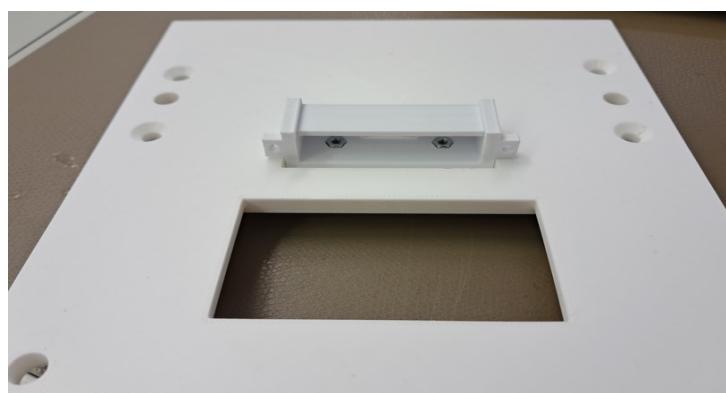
Mounting First Part of Spring Counter Part Holder [Own Illustration]
